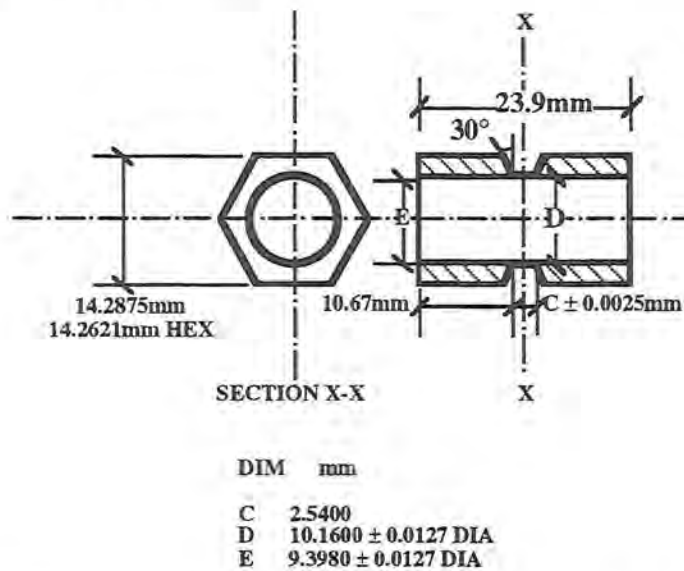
Dimensions and Tolerances of the Torsion Hopkinson Bar Specimen.
